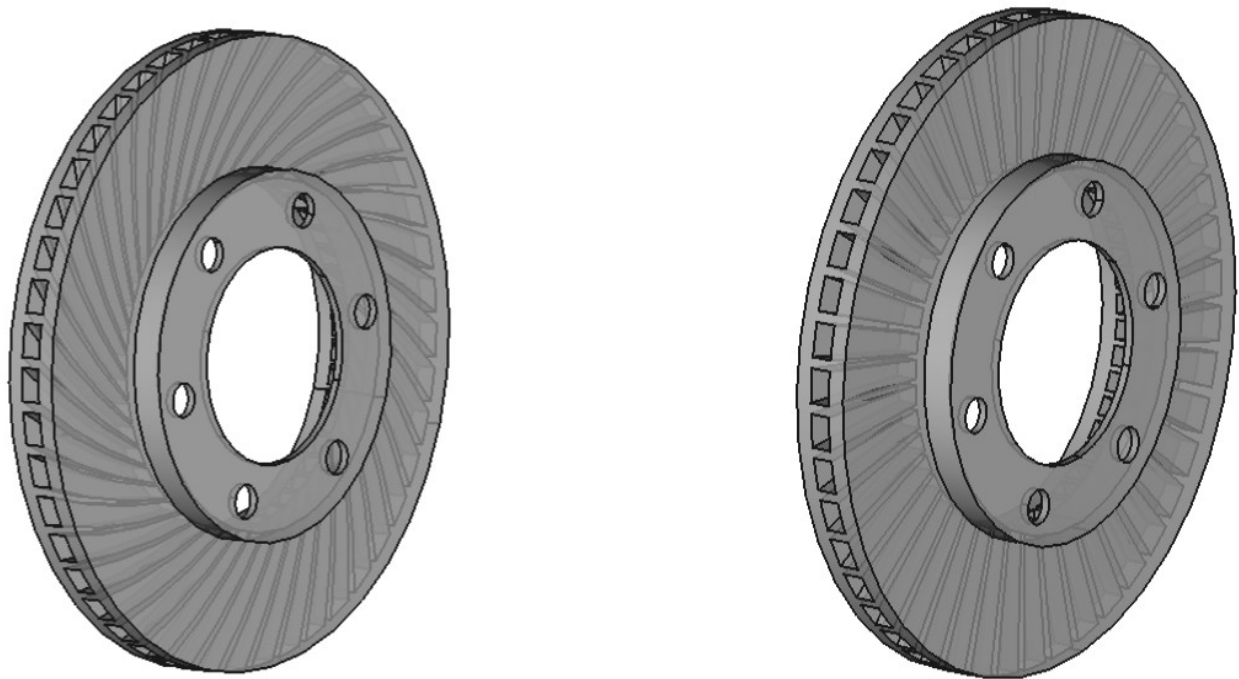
Directional disk brake rotor (Left); Radial disk brake rotor (Right)
